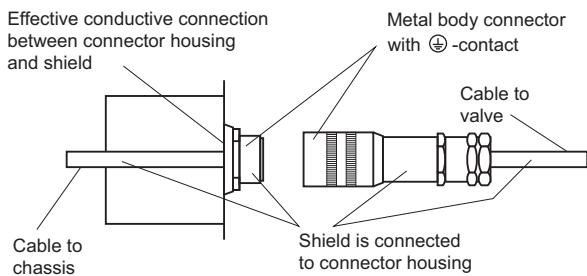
Connecting the cable shield via connector to the control cabinet's wall
